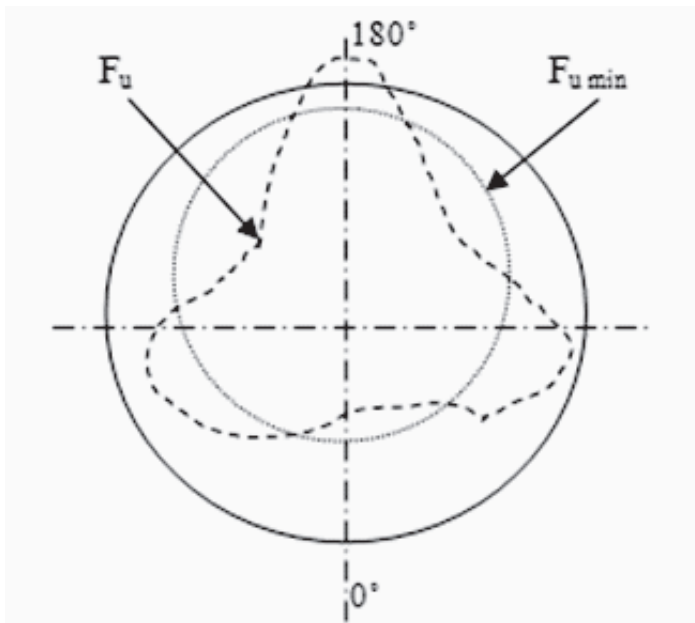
Profile of deformed shaft fixed into three-jaw chuck (own elaboration based on: Z. Murčinková, K. Vasilko, *The real shape of the workpiece after turning and milling*, „Journal of Production Engineering” 2013, vol. 16, p. 33–36.)
